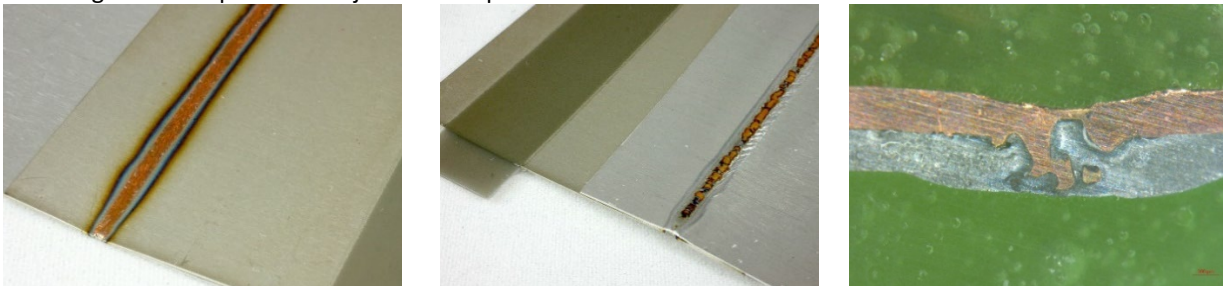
Full penetration weld of Ni-coated copper (0.3 mm) to aluminum sheet (0.3 mm) ($v=75 \text{ mm/s}$, 450 nm wavelength)
